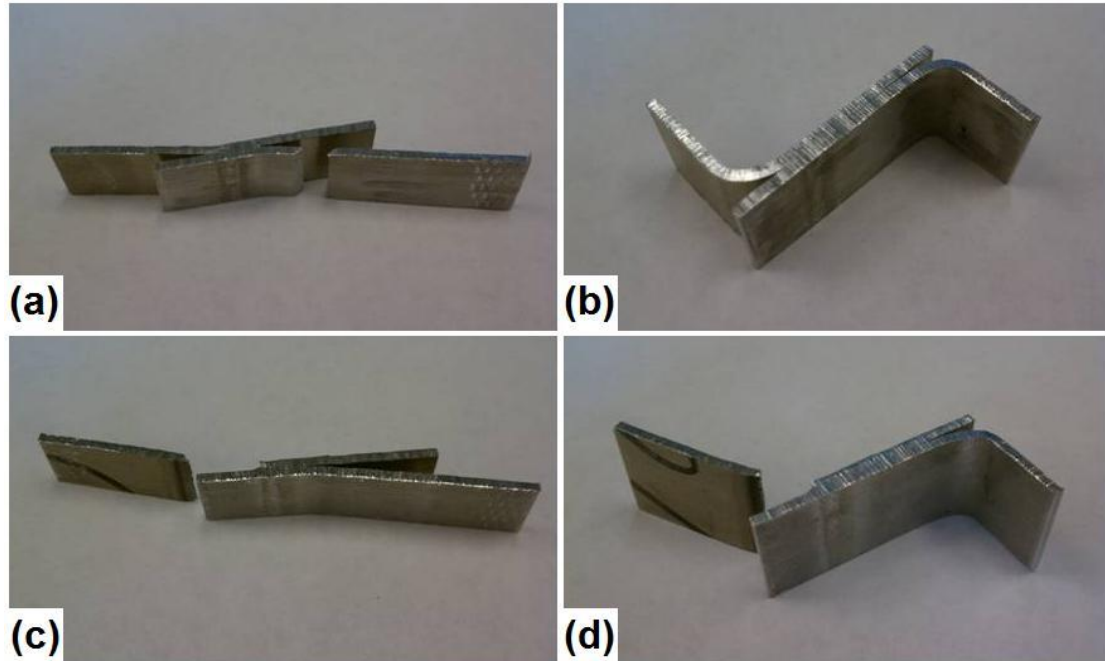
Tension-Shear and S-Bend Specimens: (a) Bottom sheet, parent failure; (b) Passing S-bend test; (c) Top sheet, nugget failure; (d) Failing S-bend test
